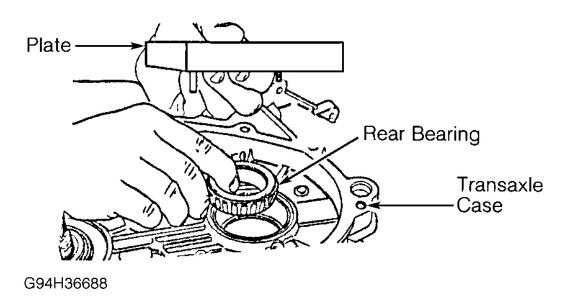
Installing Rear Bearing & Plate On Transaxle Case Courtesy of CHRYSLER LLC
